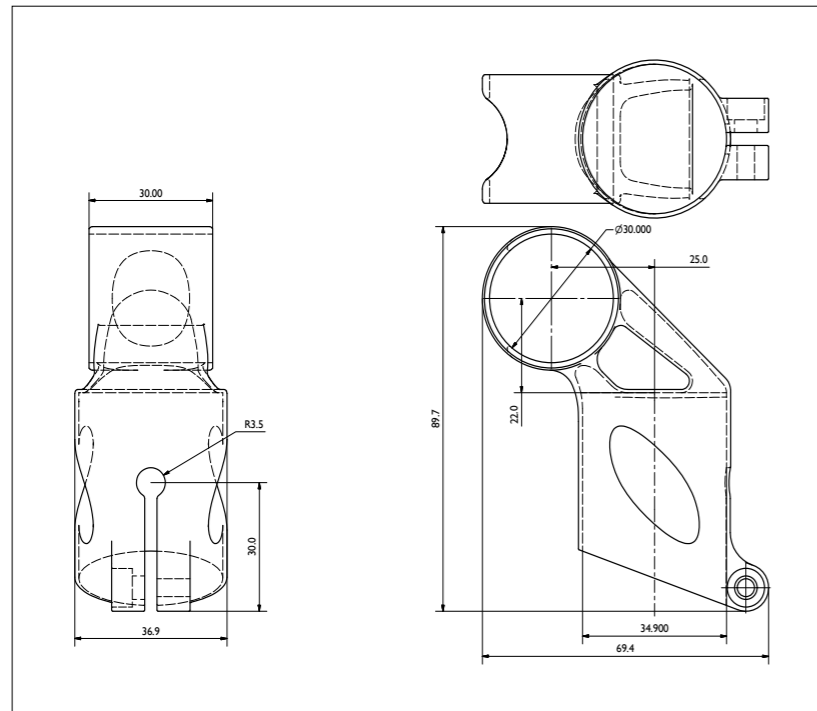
An initial drawing of the seatmast topper (Courtesy Spencer Wright)
